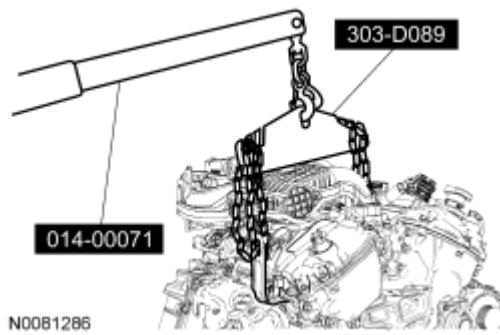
Identifying Heavy Duty Floor Crane and Spreader Bar
